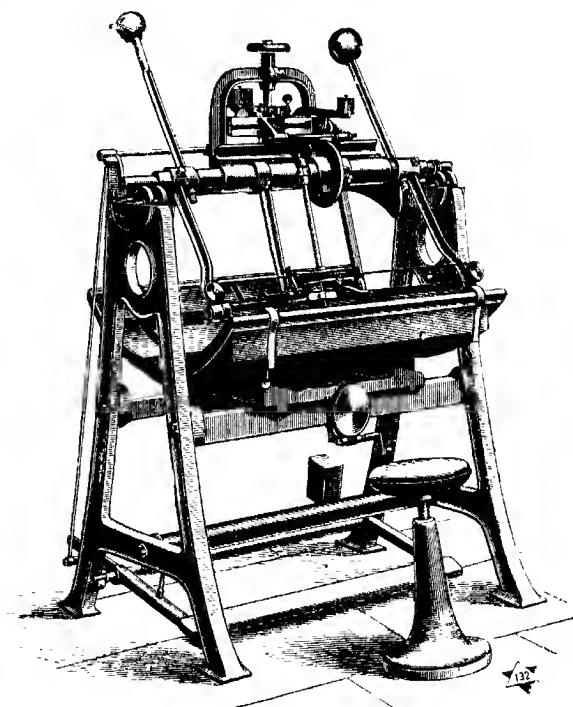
Die Pentagraph Cradle Machine (Rigby principle)
